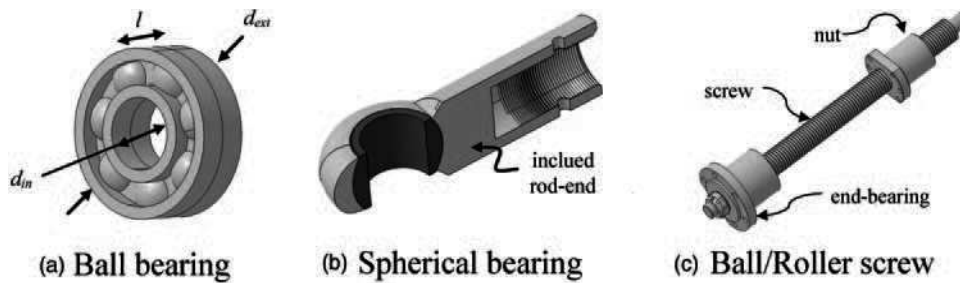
Bearings and ball/roller screws: (a) ball bearing, (b) spherical bearing, and (c) ball/roller screw
